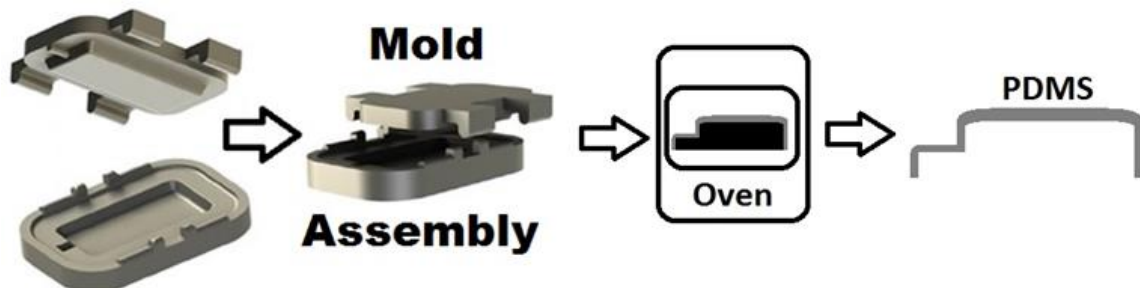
Cushion's top cover fabrication using the assembly mold.
